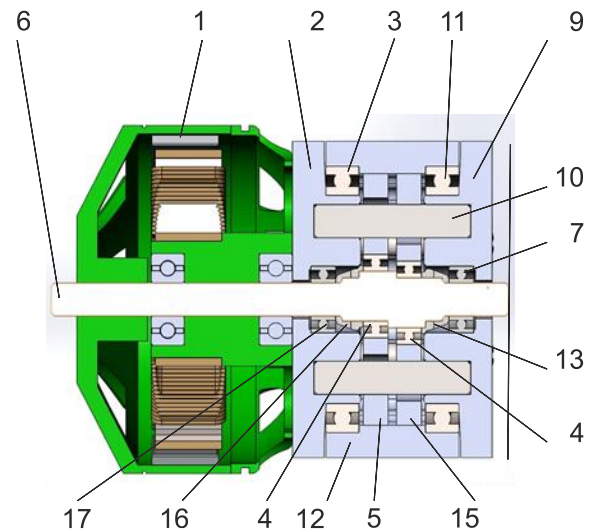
Assembly axial-section sketch of the BLDC electrical motor and cycloidal reducer developed
